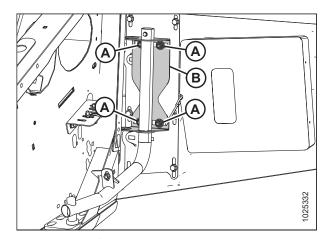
Left Endshield Support Tube on D1X Series Header
